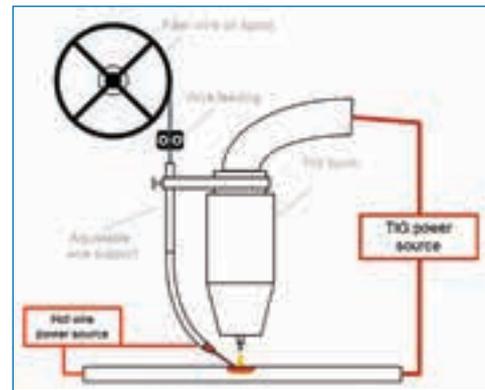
A welding process diagram for TIG hot wire welding.
